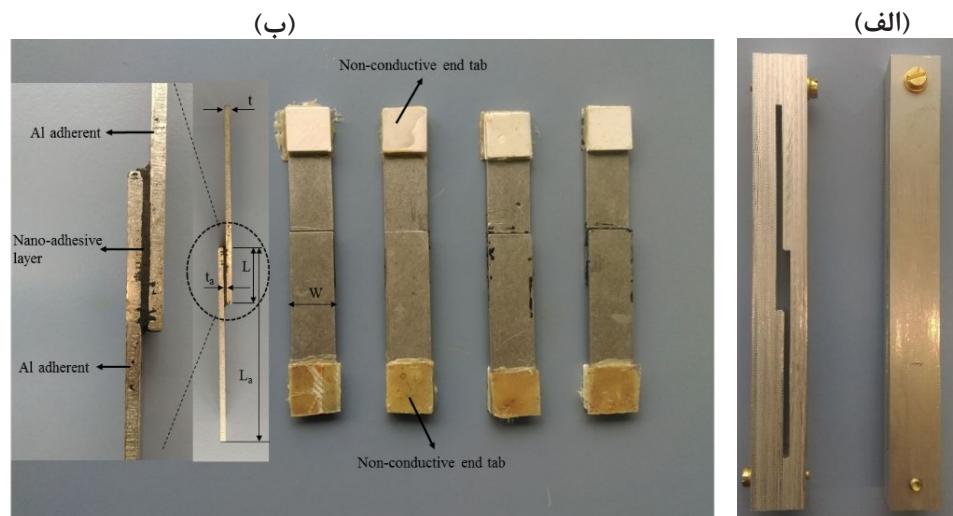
Single lap adhesive joints a) molds b) specimens with geometrical properties
